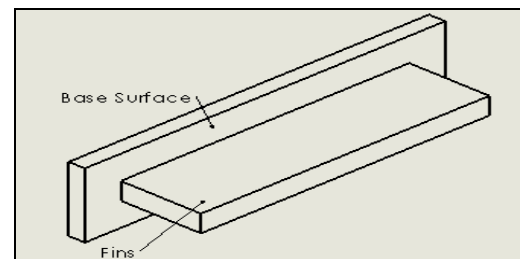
solid extruded surface with fin without projection (isometric view)
